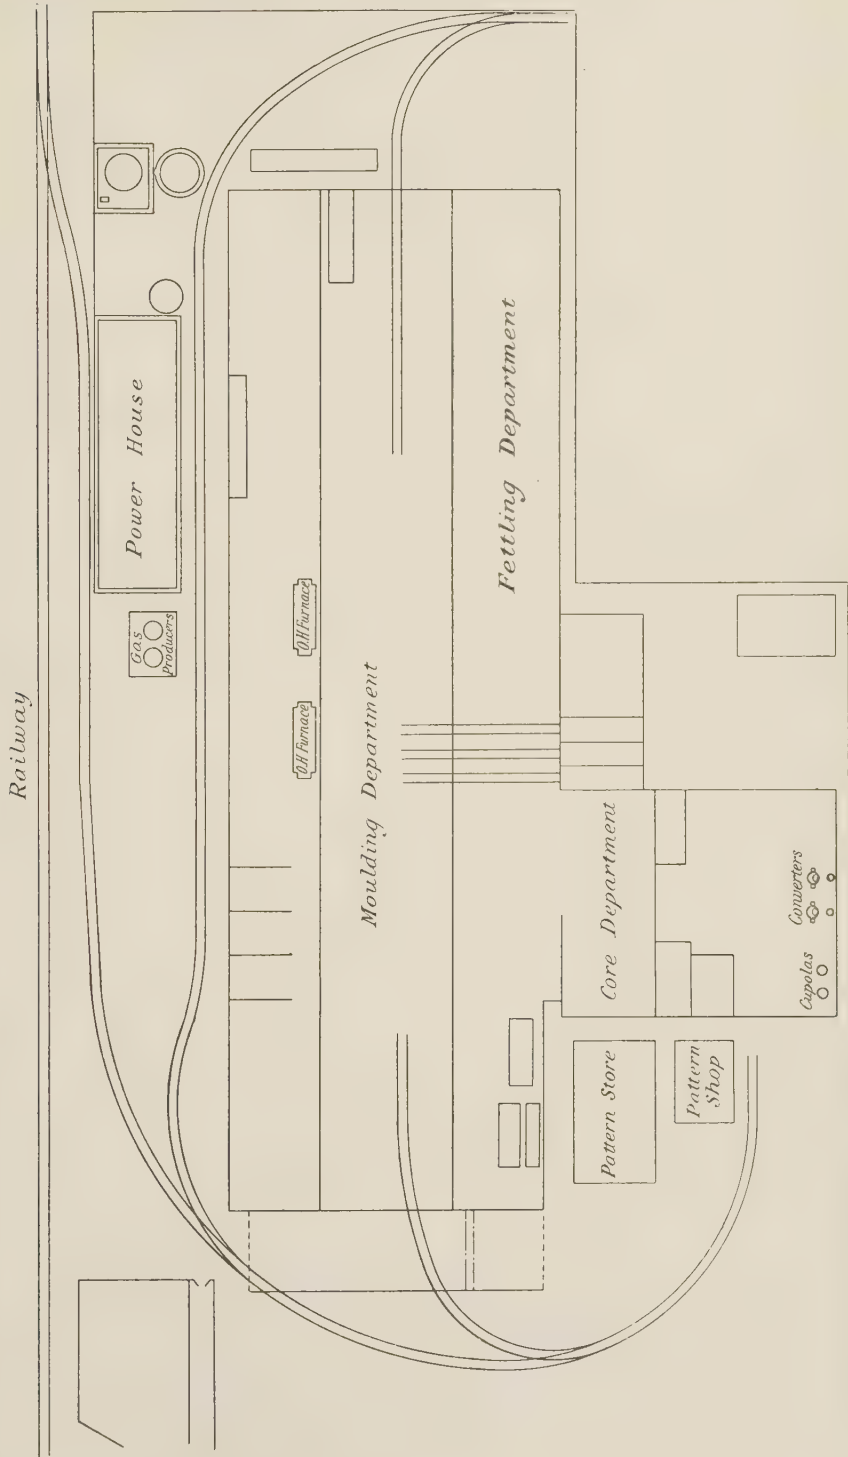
Plan of Steel Foundry (showing Converter Plant), Detroit Steel Casting Co., U.S.A.
